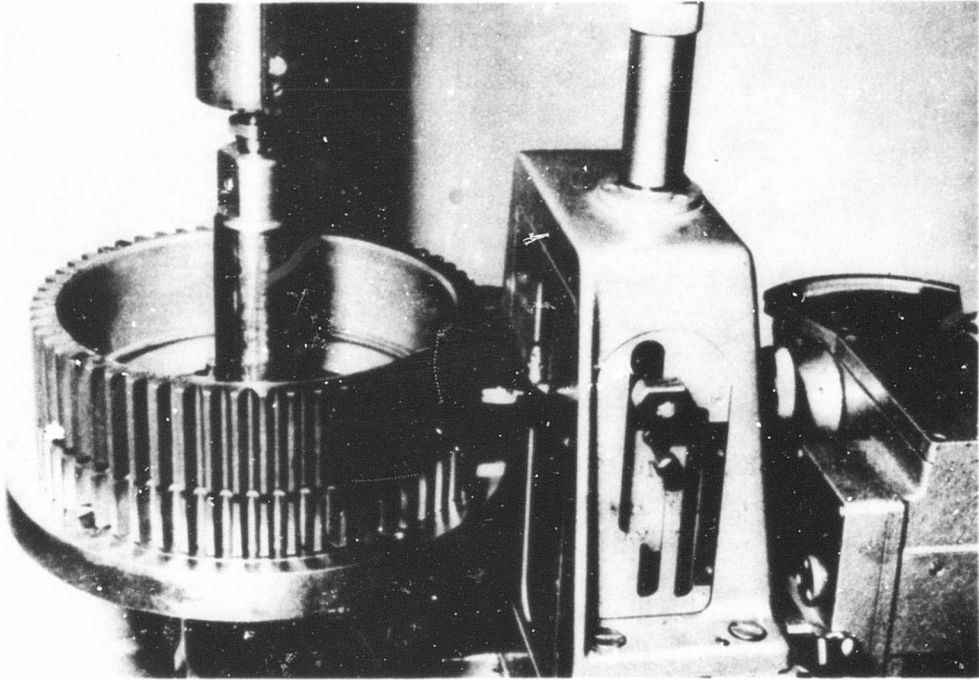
Measurement of Profile on the Upper Stage Planetary Sun Gear Performed by the Hofler Gear Measuring Machine.
